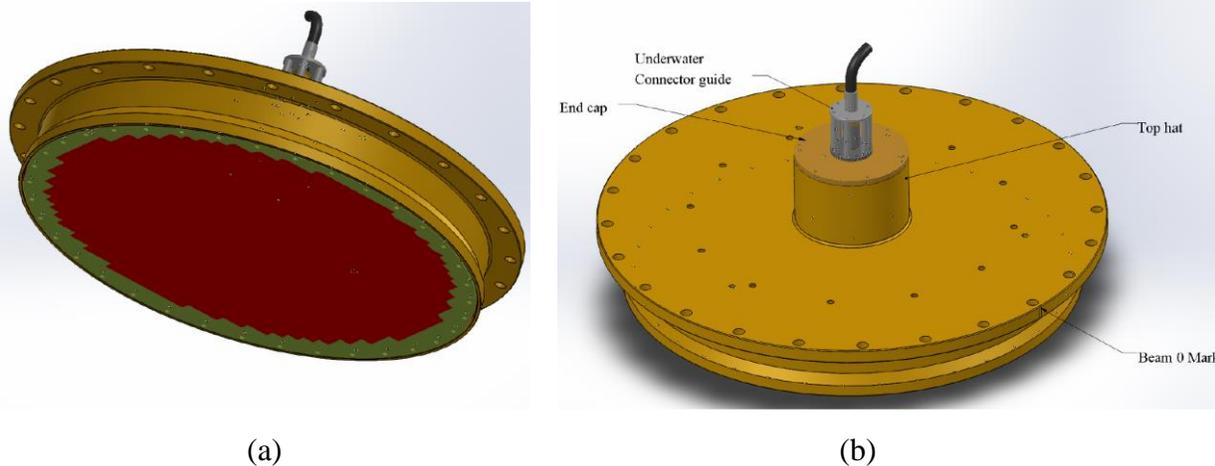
Vessel Mount Dual-Frequency transducer housing showing the (a) transducer face encapsulated with red colored poly urethane and (b) the top view showing the underwater connector guide, top hat, Beam 0 Mark.
